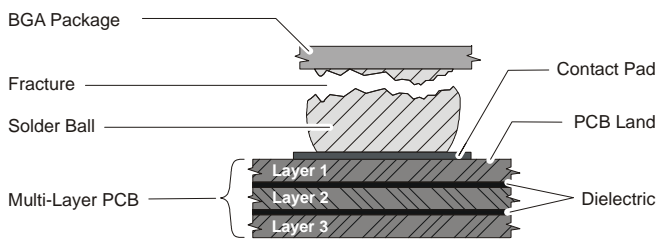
Cracked Solder Ball (Bump), 15mm BGA [8].
